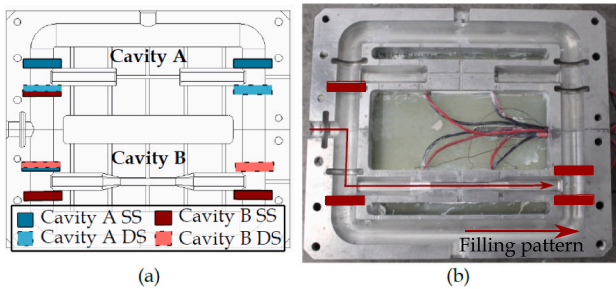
Mould unit, injection configurations. (a) Schematics of possible injection configurations (b) Example configuration for Cavity B (Draft-part) SS.
